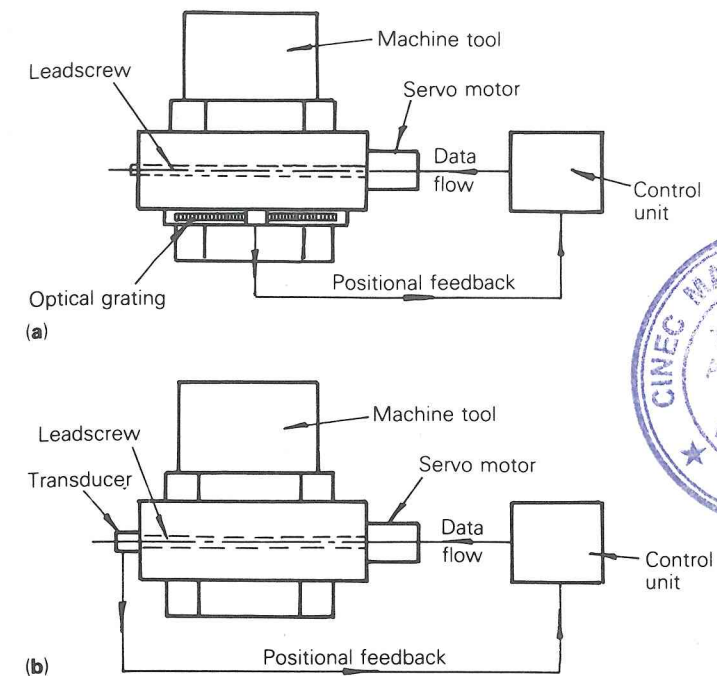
Location of positional transducers on machining centers: (a) linear transducer; (b) rotary transducer.
